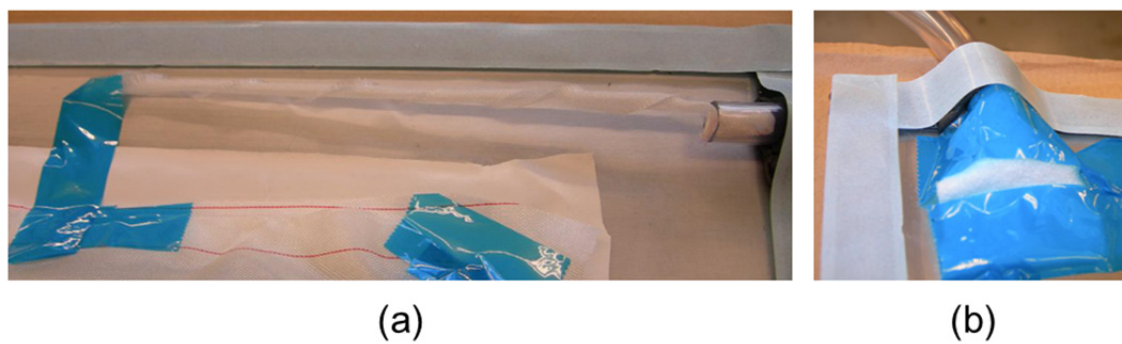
Outlet tube setup: (a) Twisted peel ply and (b) Piece of cotton
